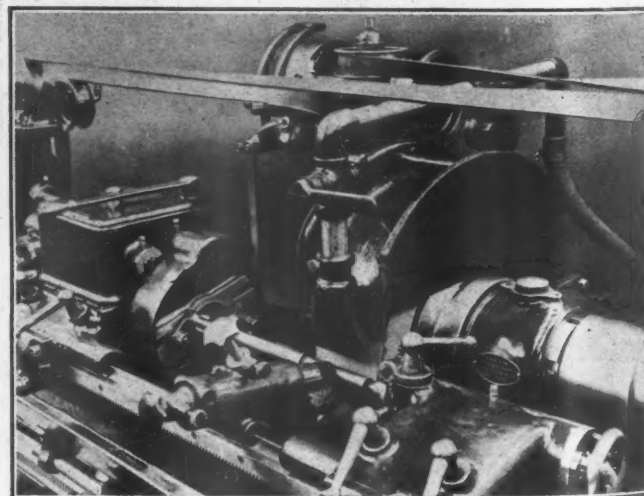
Plain Grinder with $5\frac{1}{2}$ -in. Wheel Grinding Motion Pins
